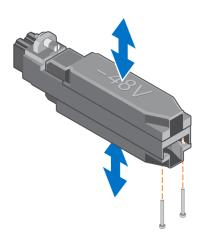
Removing the two 1.5 mm hex screws and separate the housing
